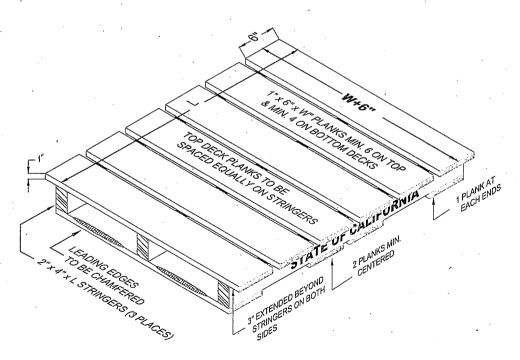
TYPE 4 SINGLE WING WOODEN PALLET
